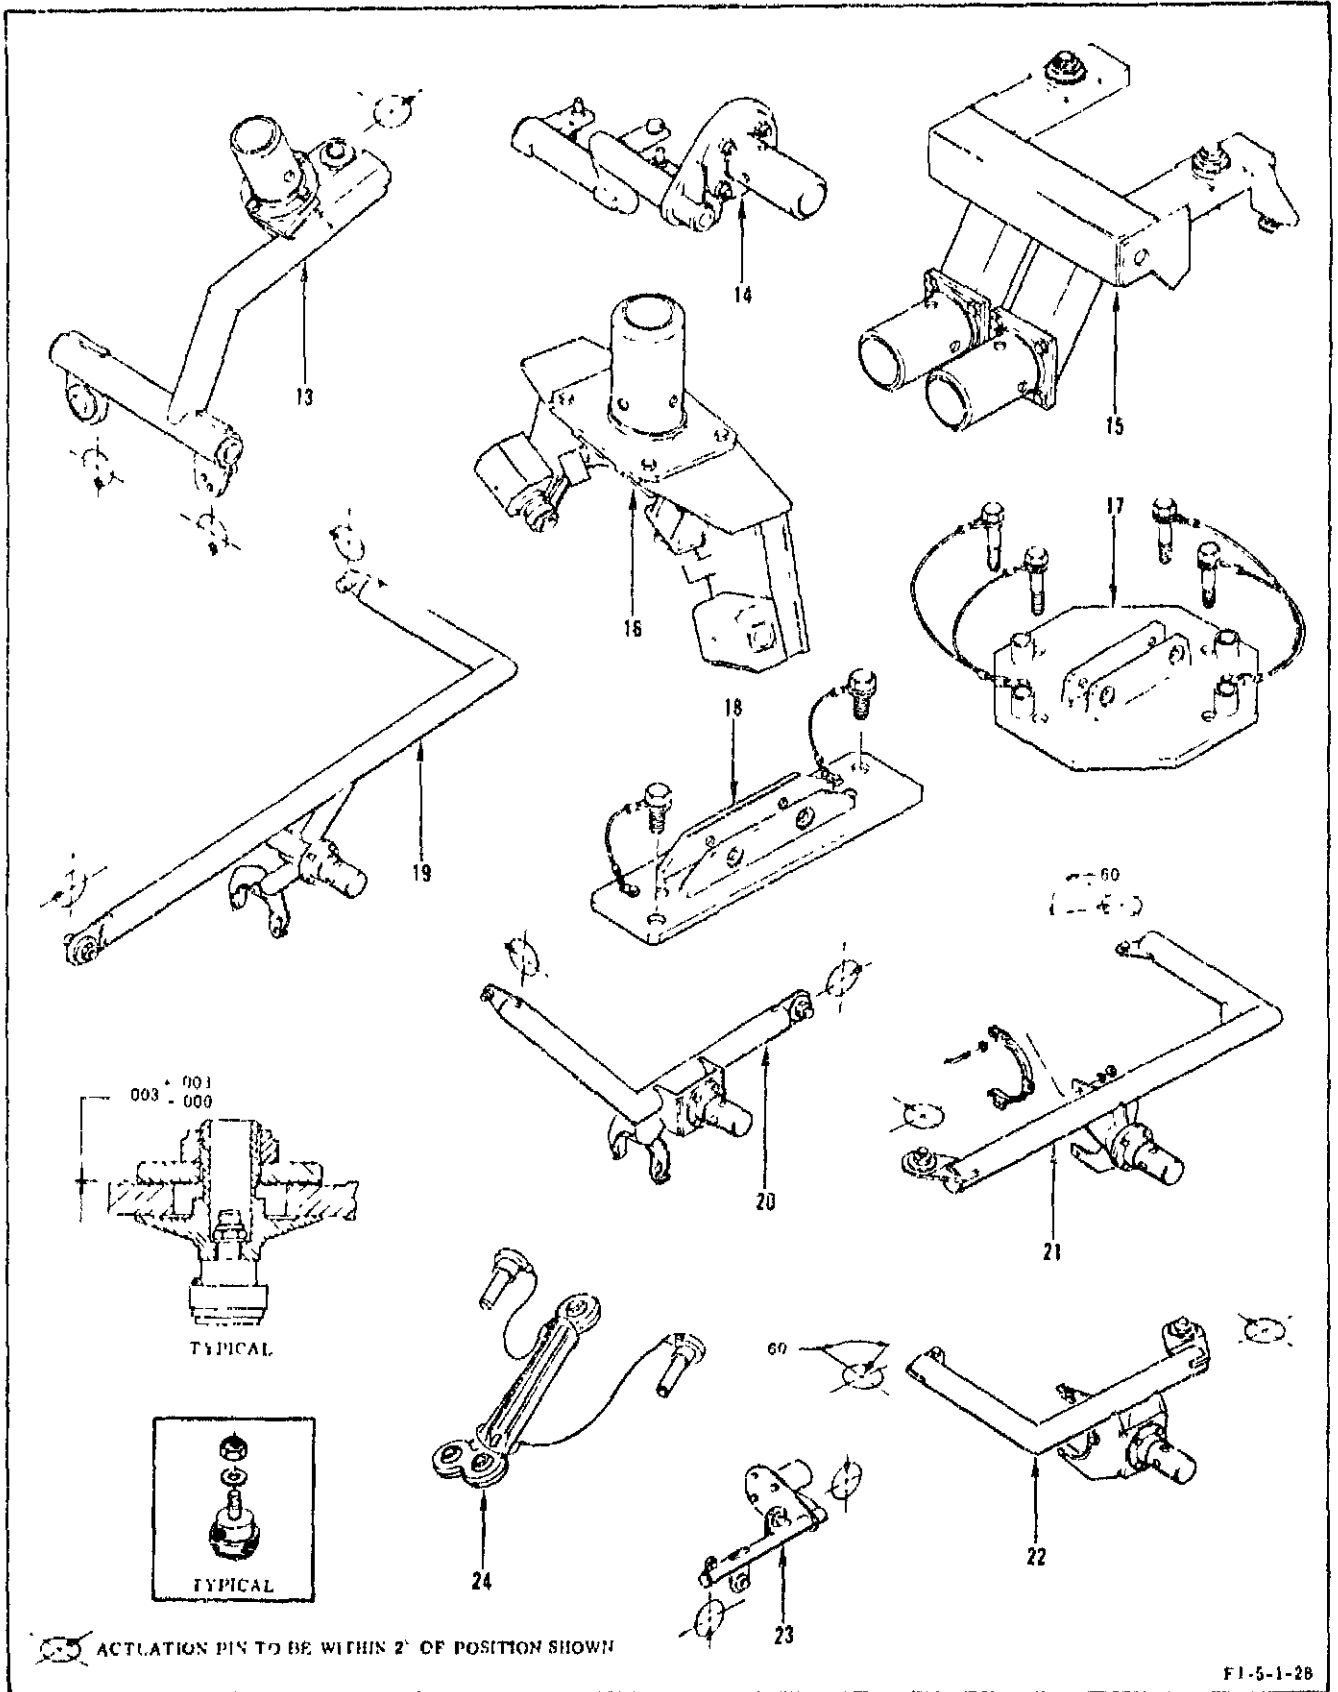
Component Handling Fixture Set (Sheet 3 of 7)
